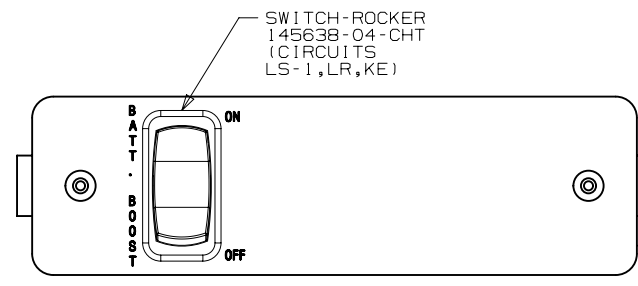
PLATE-SWITCH, MOUNTING 152419-03-CHT
